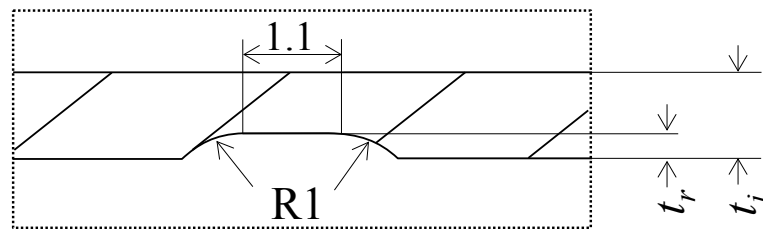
Shape and geometries of specimen for uniaxial tensile test (in mm).
